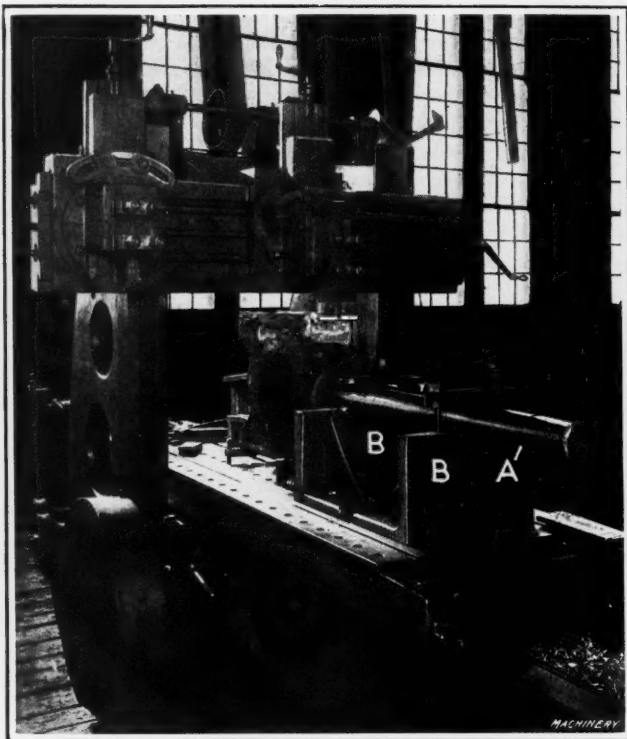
V-block Fixtures and Special Mandrel that are used for holding Cross-head while the Guide Bearings are being planed
